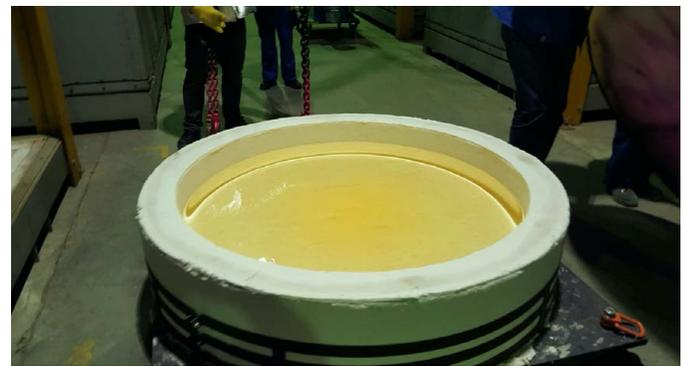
Mould with a 1500 mm diameter SCHOTT N-BK7[®] casting.
